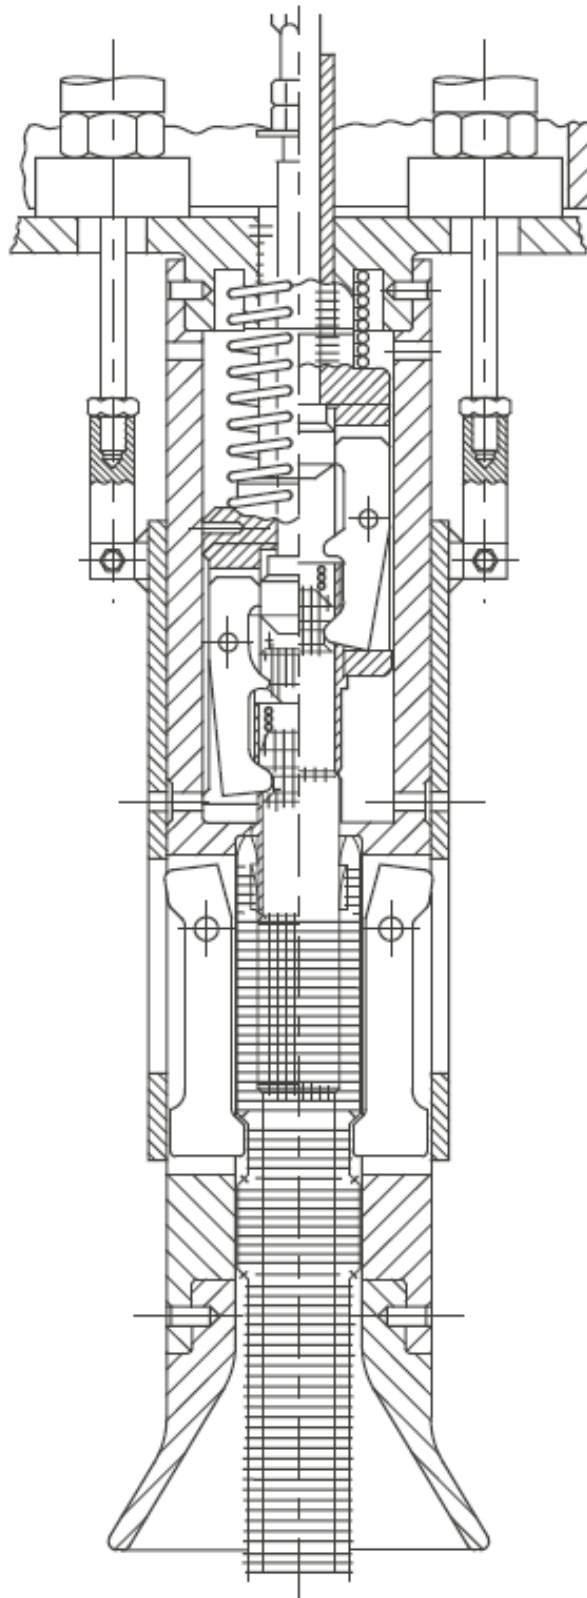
Rod Drive Shaft Unlatching Tool
